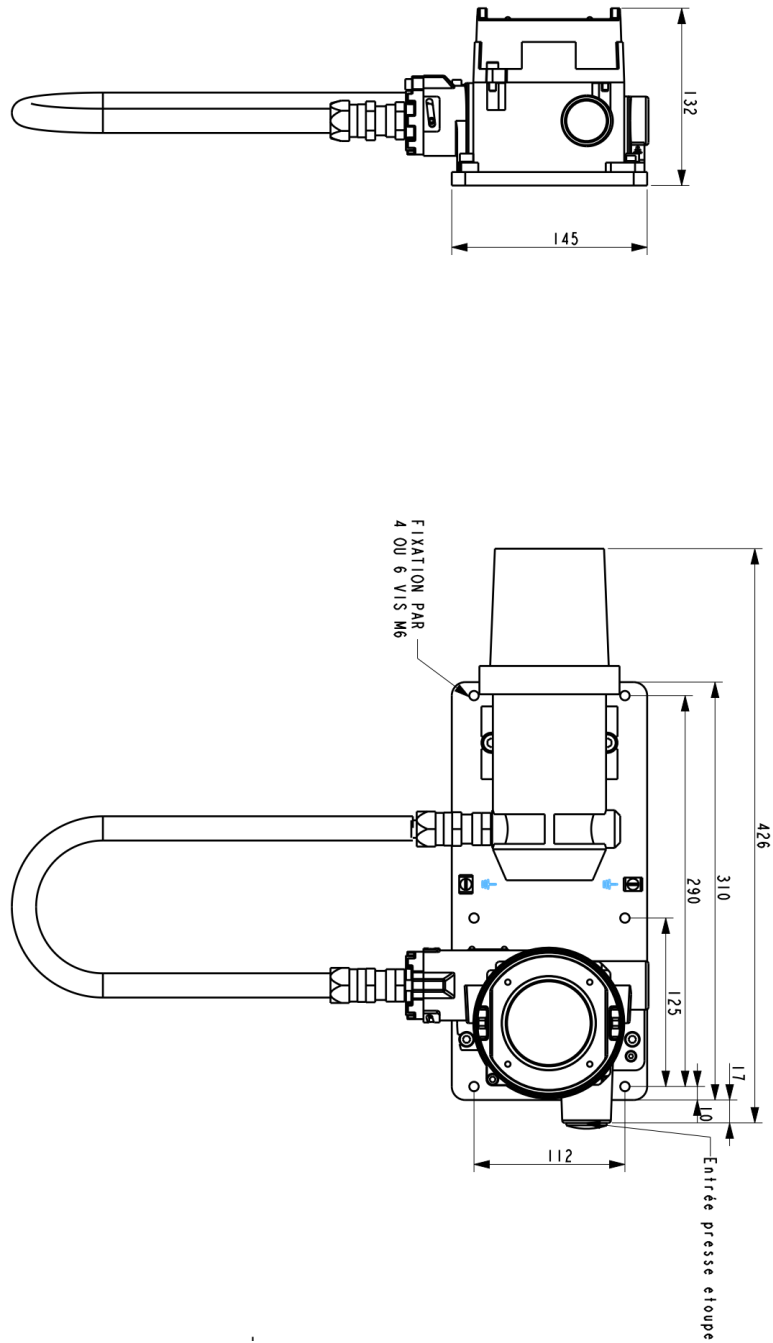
Dimensional characteristics of OLCT 60 equipped with GD10P mounting on plate
